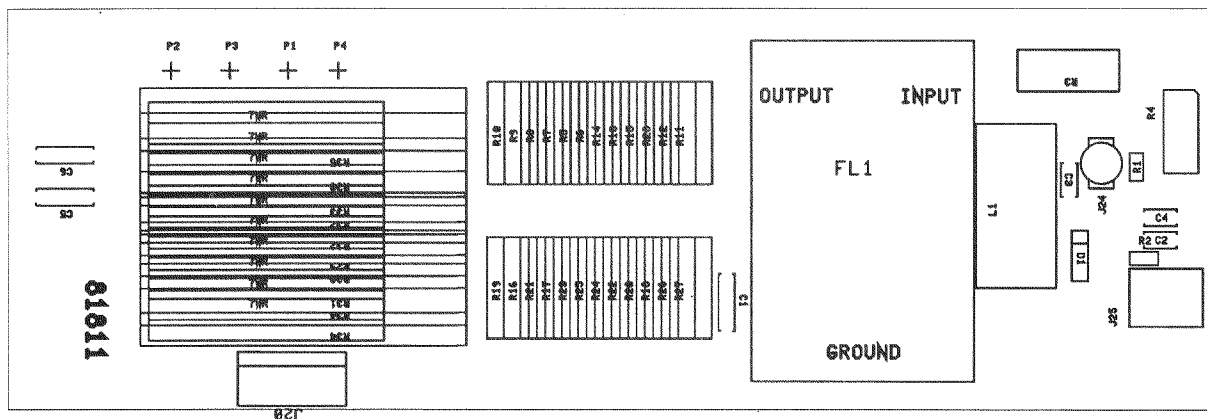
INPUT MATCHING BOARD COMPONENT LAYOUT TOP VIEW
